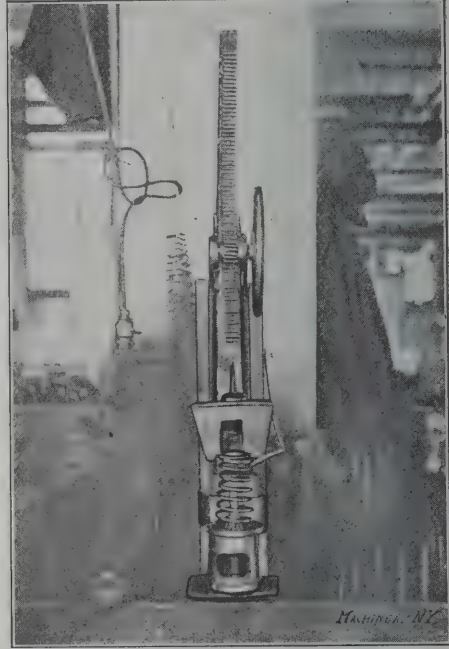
Device for Compressing Valve Springs when Assembling Cages
